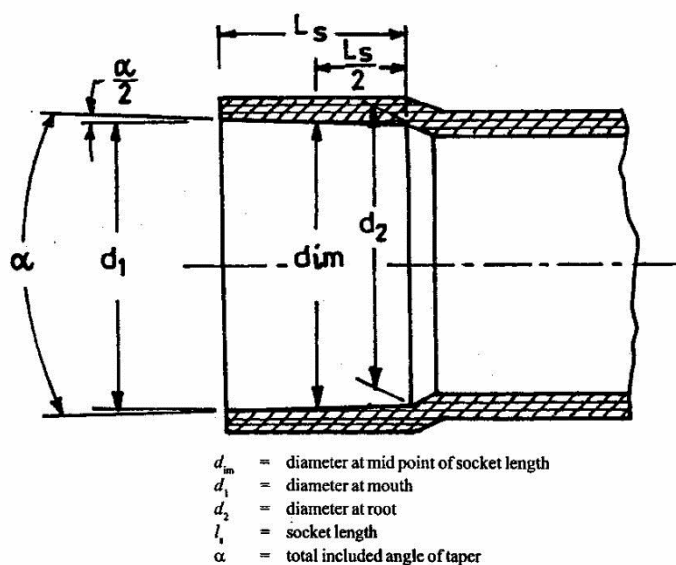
SOCKET DIMENSIONS FOR SOLVENT CEMENT JOINTS
